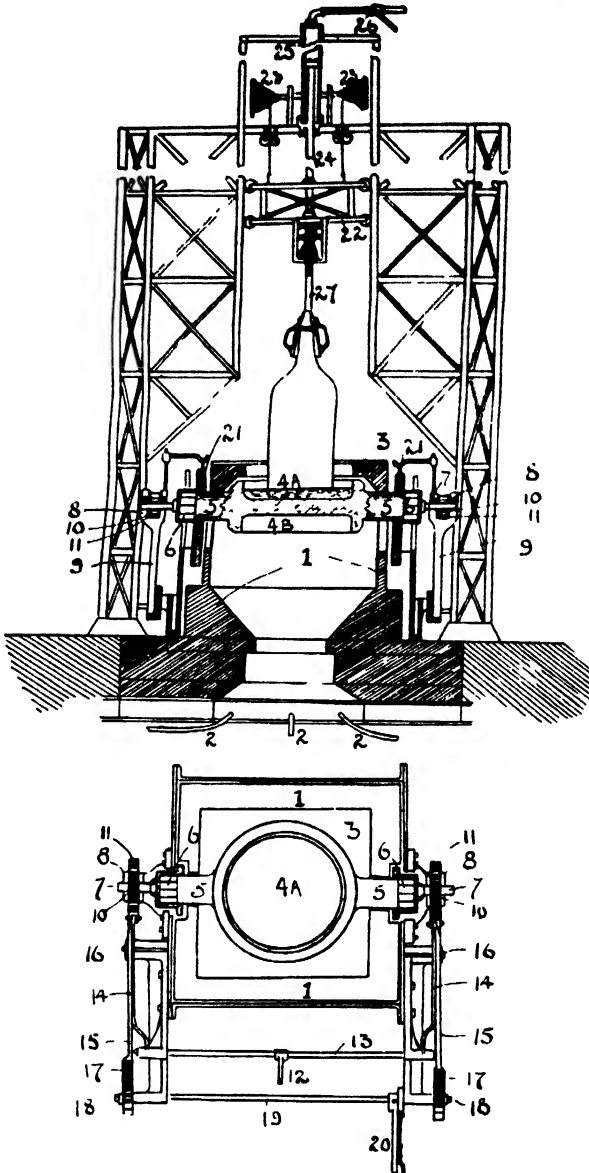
THE LUBBERS CYLINDER DRAWING MACHINE.
